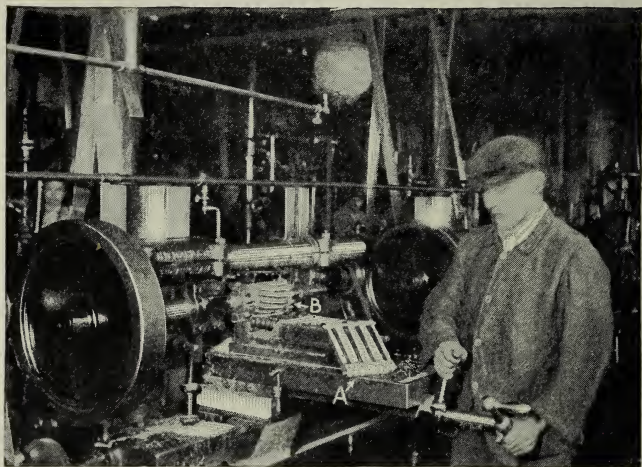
Shaping Cranks.—A, “gallery” of shaped cranks; B, revolving cutter.
